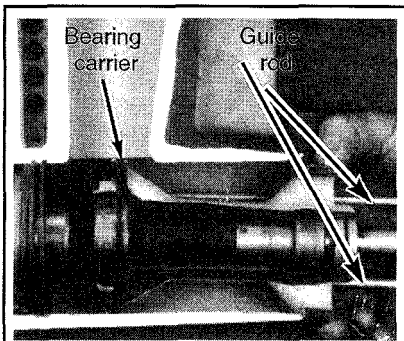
Using 2 thread-all rods as guides carefully insert the bearing housing ...
